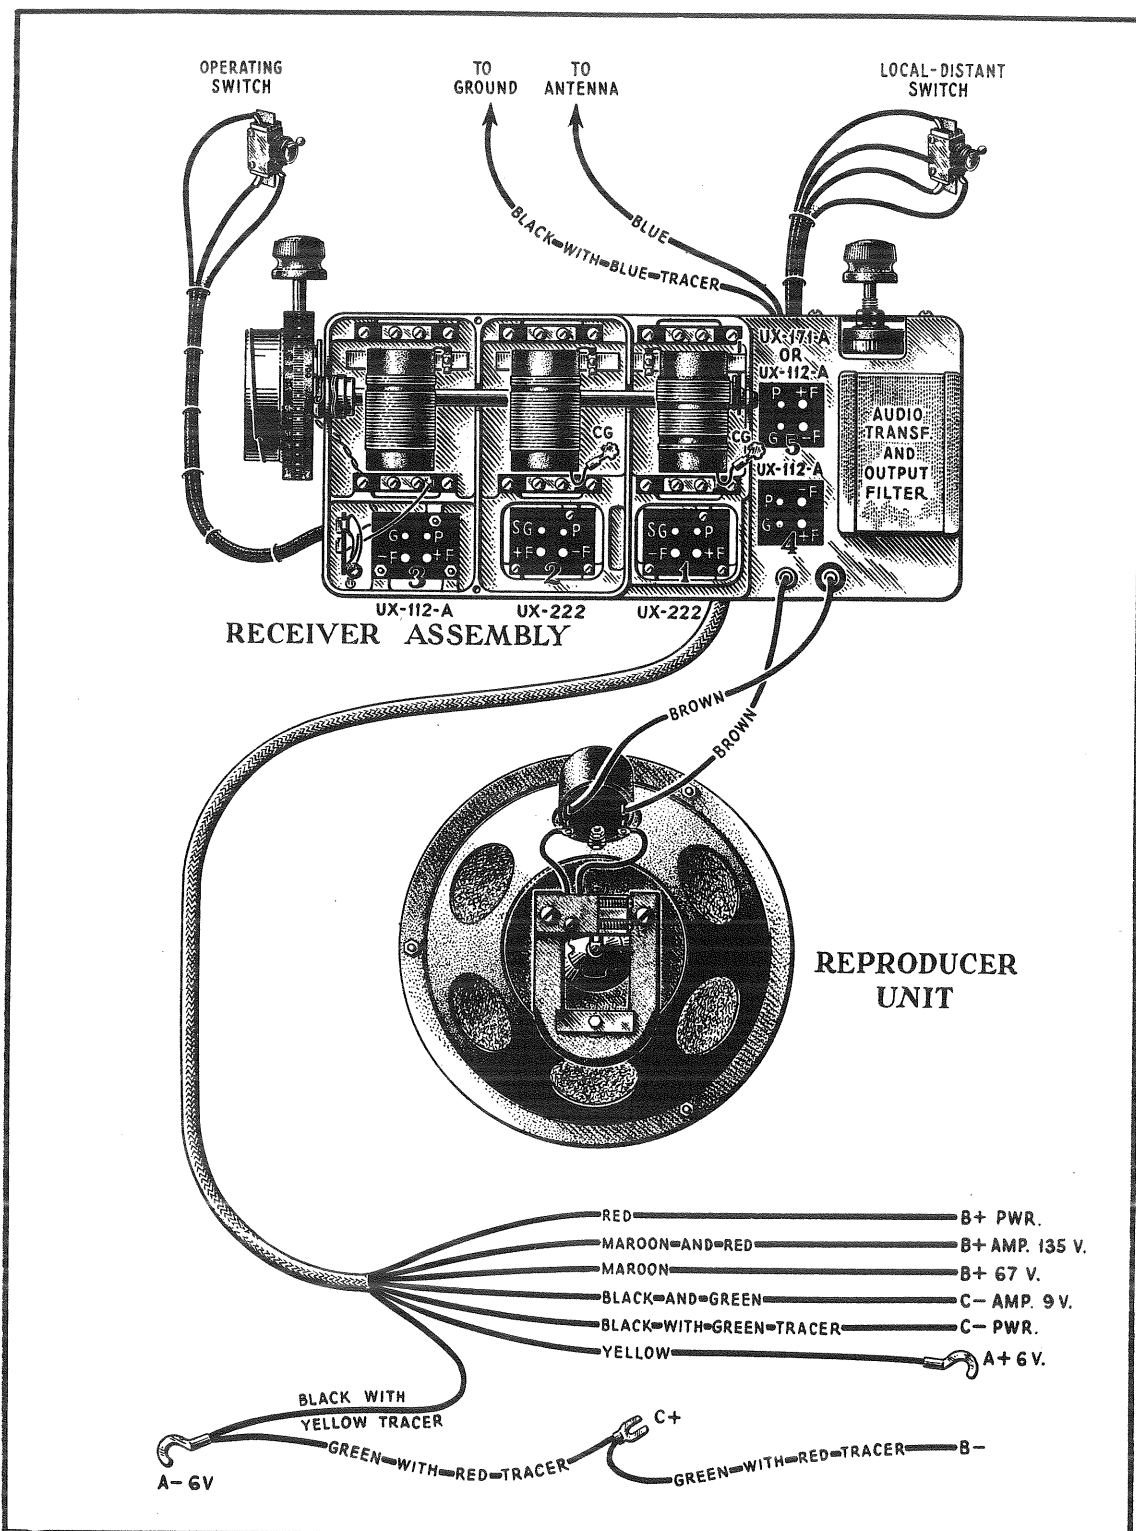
Radiola 22 battery cable and external connections of receiver assembly and reproducer unit
